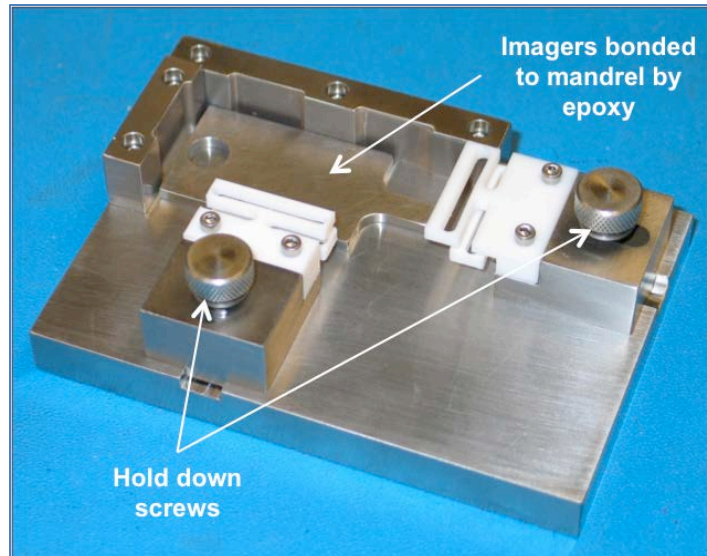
Two-axis precision mounting tools ensure that imager surface and mandrel are well mated. This ensures that no cocking is introduced when final camera integration of the 12 CCDs is performed.
